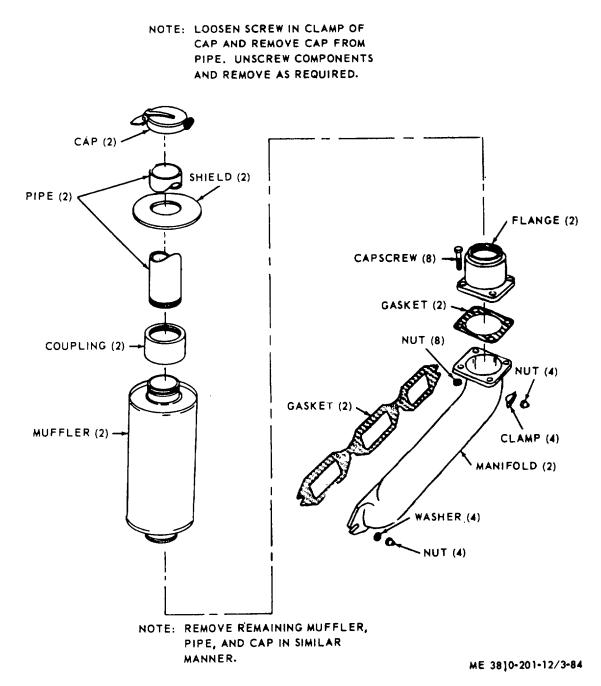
Exhaust pipe, muffler, and cap, removal and installation (engine model 687C-18-ES).
